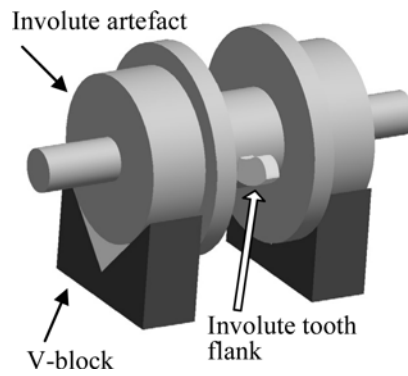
Setup of involute artefact for measurement using coordinate measuring machine.
